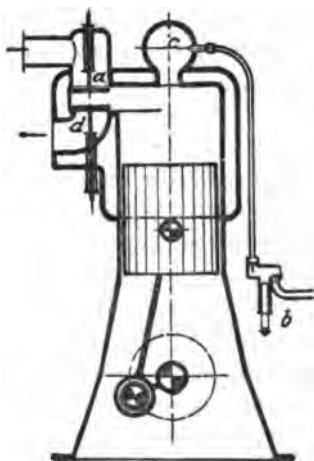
Explosion oil engine having a four-stroke cycle. *a*, air valve; *b*, fuel pump; *c*, hot bulb; *d*, exhaust valve.
